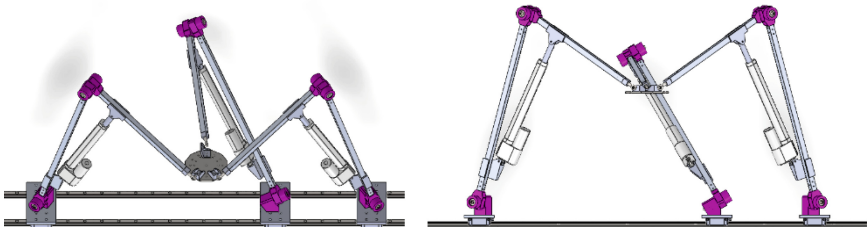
Front and back 3D view of the novel 6 DOF Parallel Kinematic Machine.
